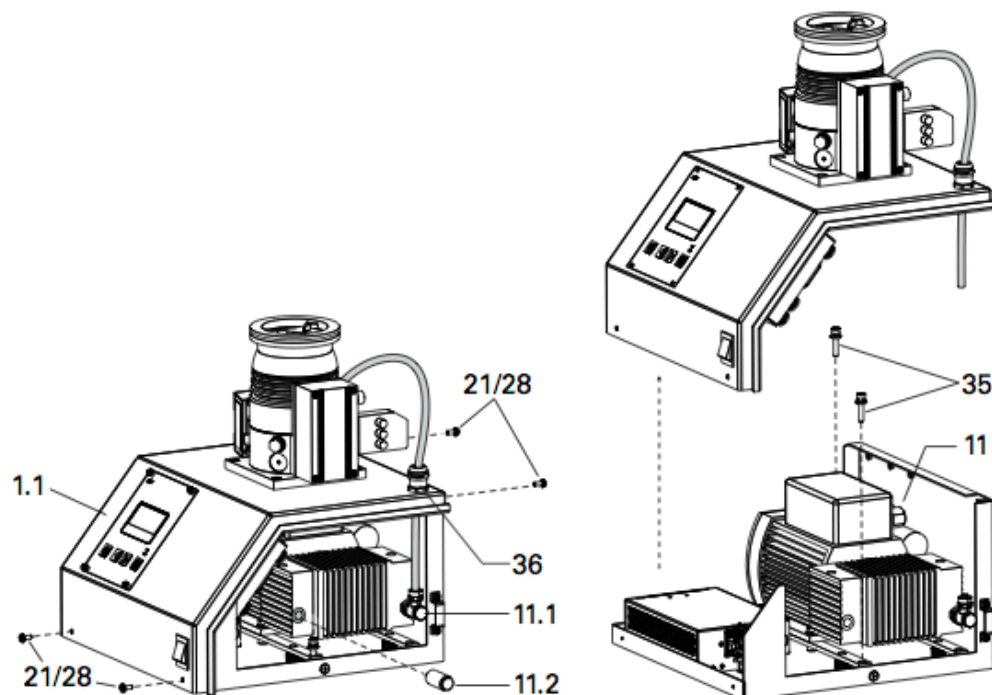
Disassembly of the diaphragm pump from the pumping stand frame
